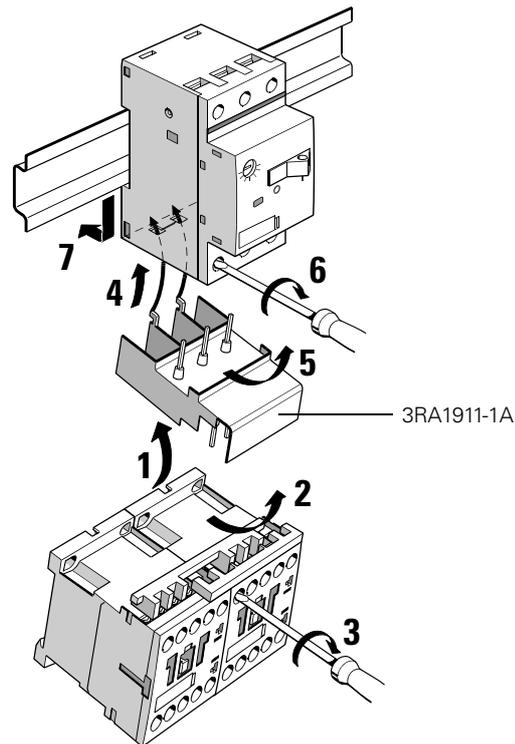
Self-assembly, rail, reversing operation (frame size S00)
